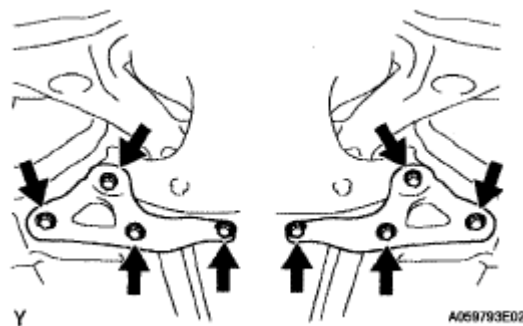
Locating Front Suspension Member Brace Rear And Bolts
